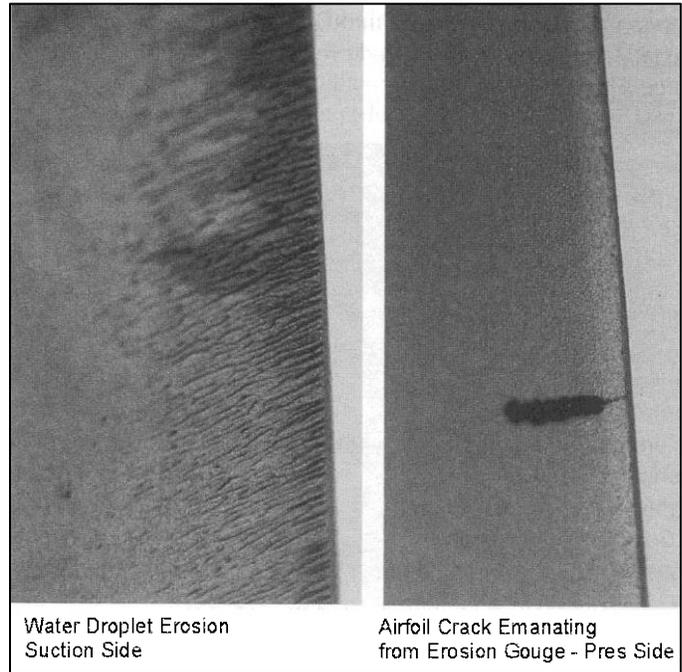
Steam Turbine Rotor Blade Cracking from Trailing Edge Erosion
